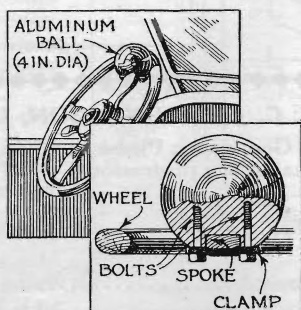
Aluminum ball attached to the steering wheel aids in spinning wheel to turn the car.
